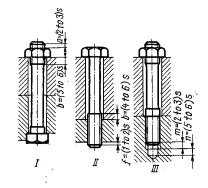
Amount of unengaged thread for the main types of threaded assemblies
